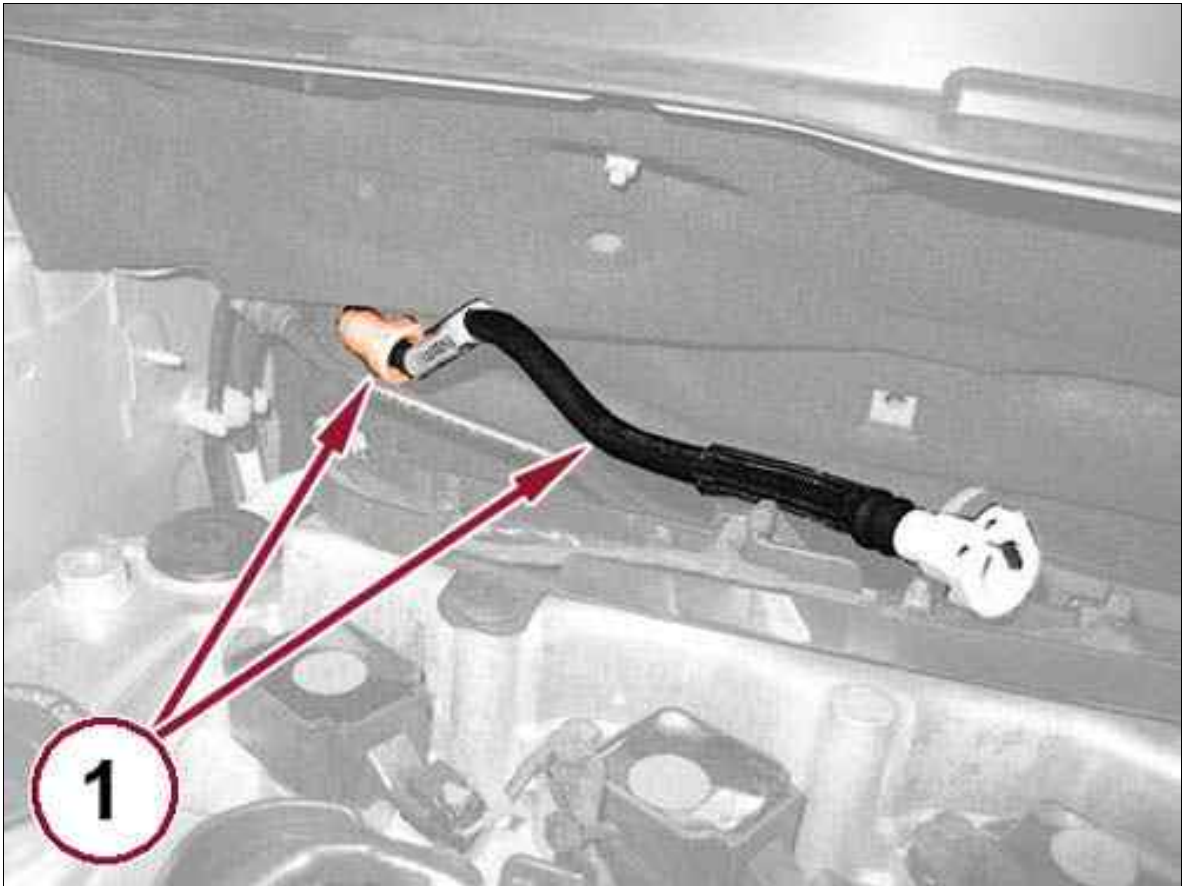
Fuel Vapor Hose Retaining Clip & Quick Coupling
